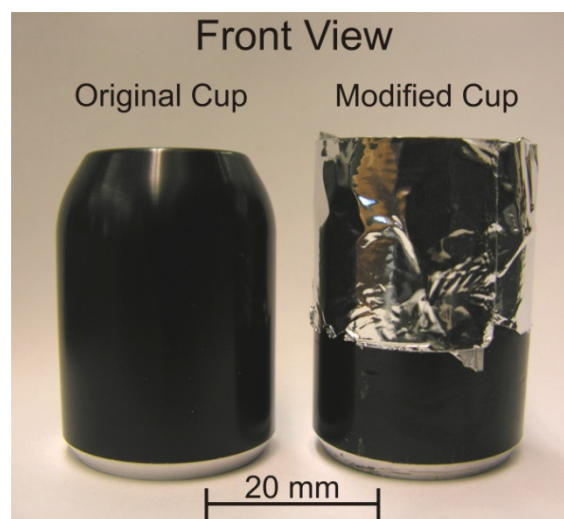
Photograph comparing original shielding cup (L) modified shielding cup (R) for the bottom B&B Machining VPPAW torch.
